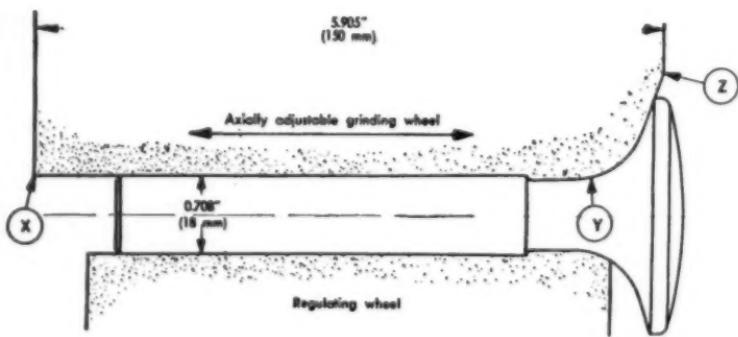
This valve stem is ground semi-automatically by the infeed method on a Lidköping centerless machine using formed grinding on regulating wheels. The surface X-Y is turned with a profiling cam. The radius Y-Z is turned by a special diamond holding device. 100-120 pieces per hour are ground with a "fine" finish, round within .00008", and to size within .0002".
